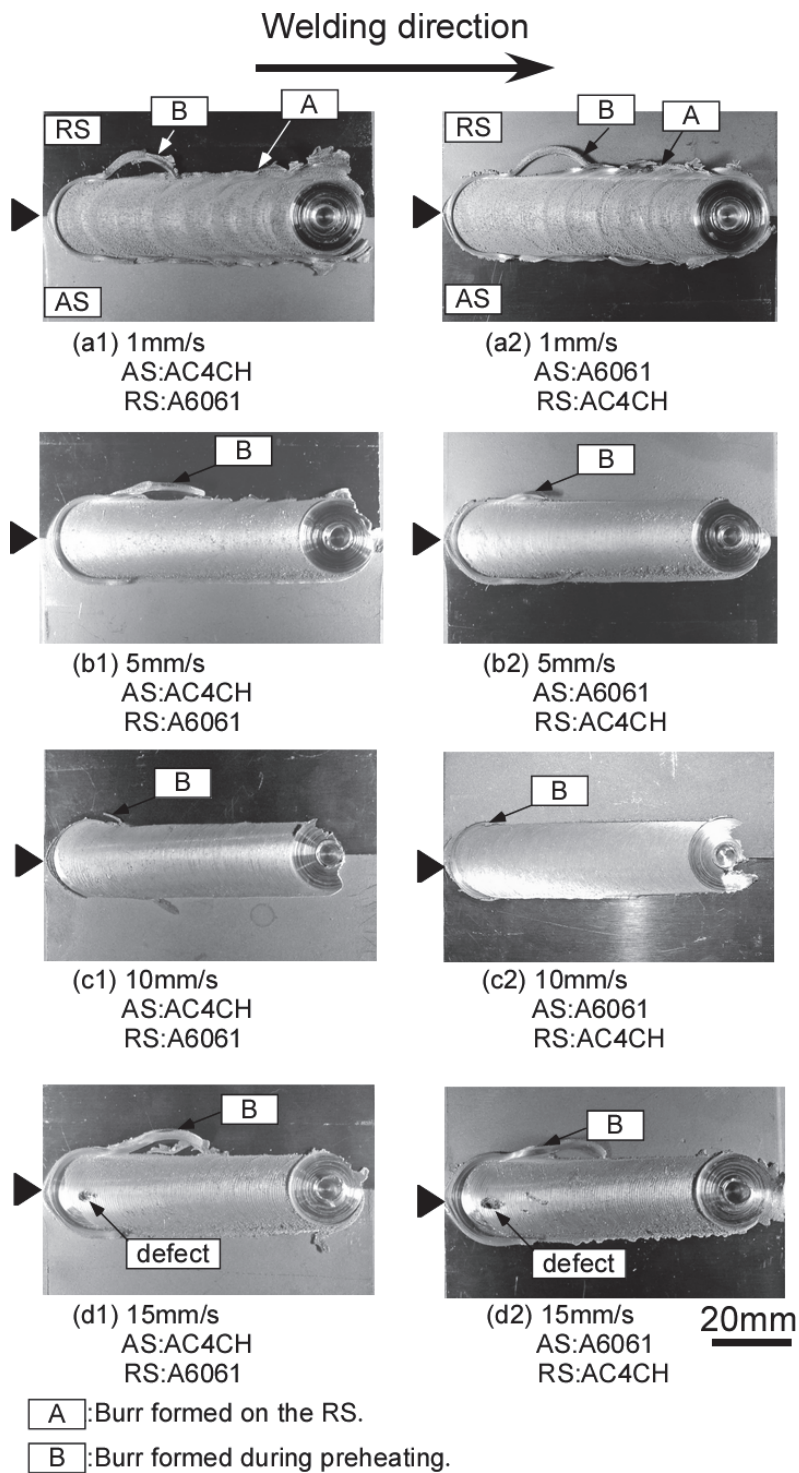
Appearances of FSW joints welded under various conditions.
